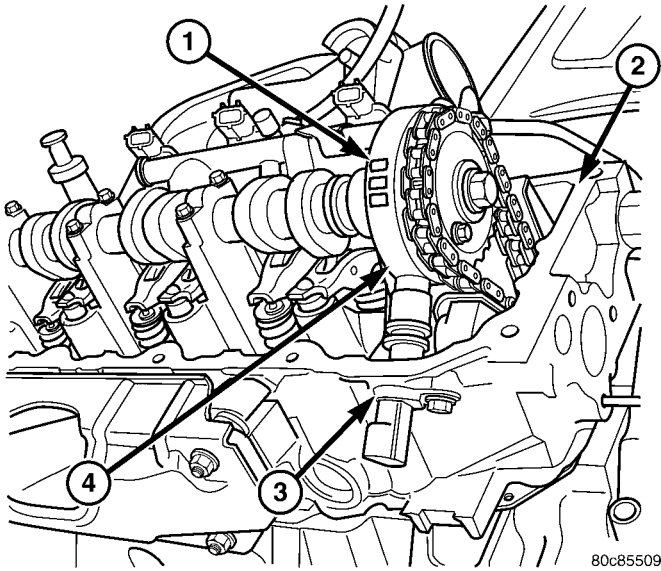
CAMSHAFT POSITION SENSOR LOCATION - 3.7L
